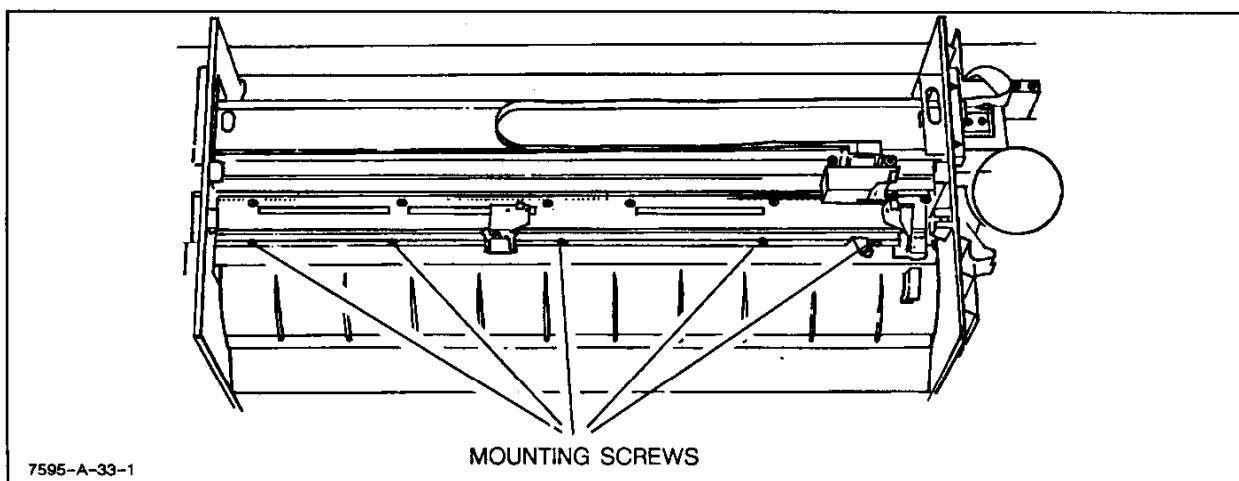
Pinch Wheel Bridge Assembly Removal
